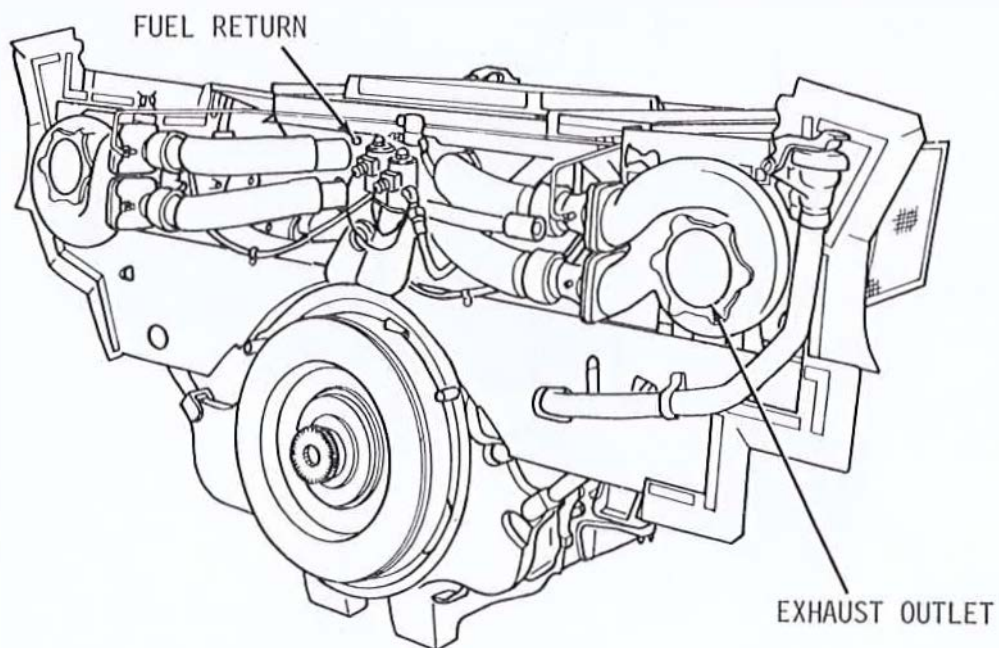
Engine connection points—left rear view, model AVDS-1790-2C and AVDS-1790-2D engines.
